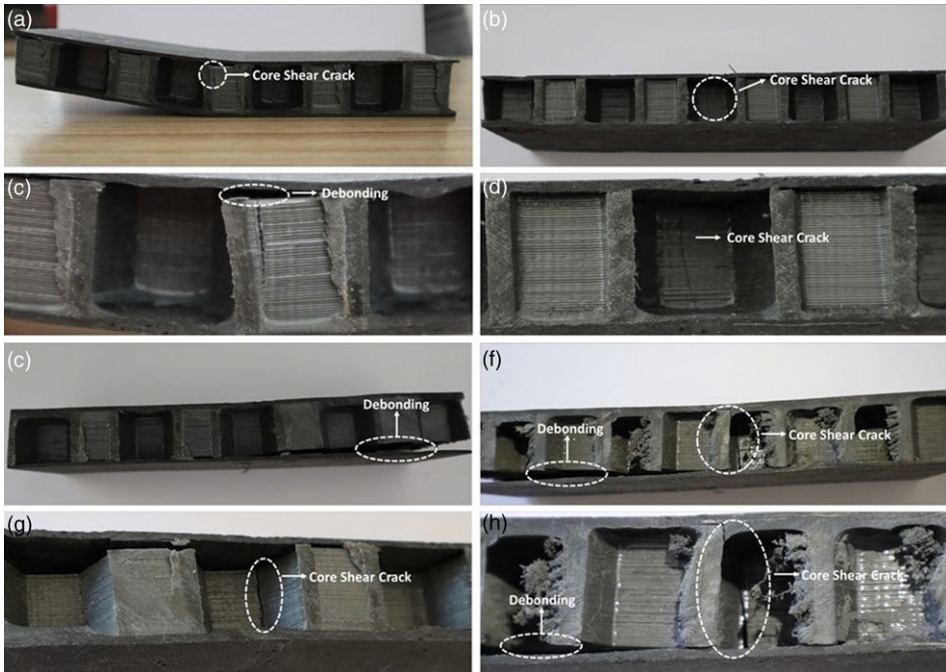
Failure modes of hollow honeycomb core sandwich composite specimens from the three-point bending test.
